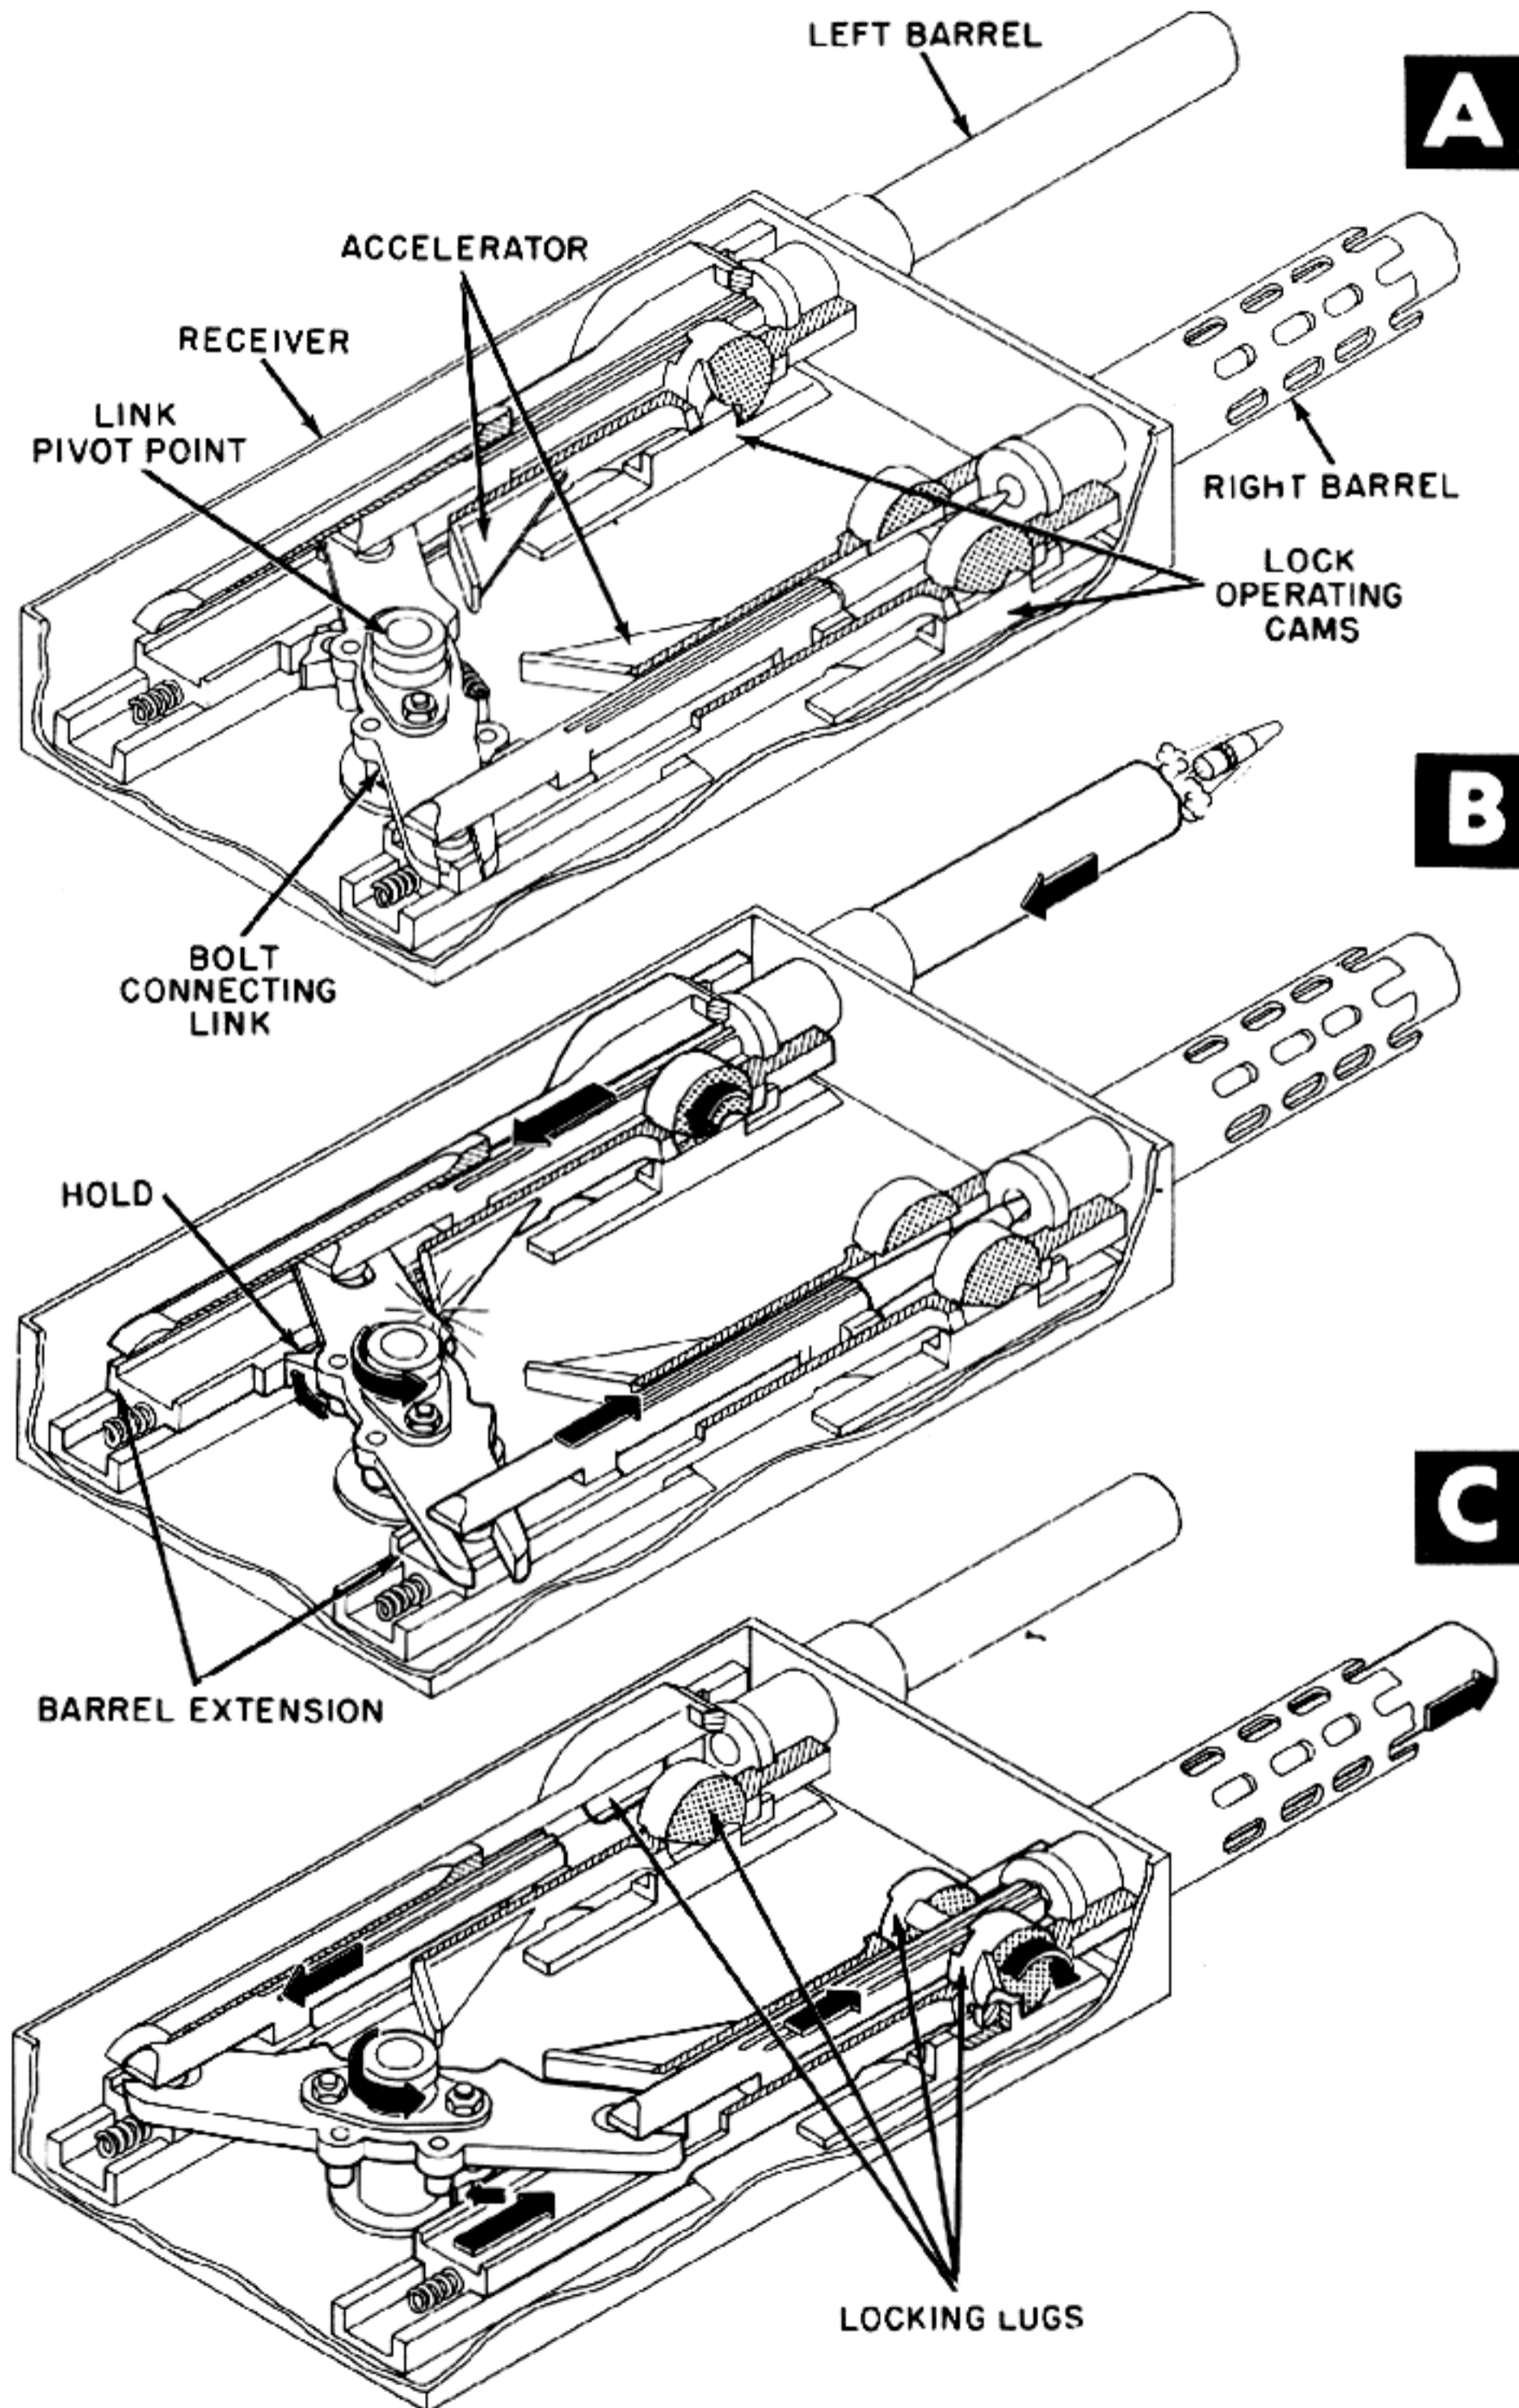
Double Barrel Gun. Barrel Extension Recoils, Unlocking Rotary Locking Blocks.
